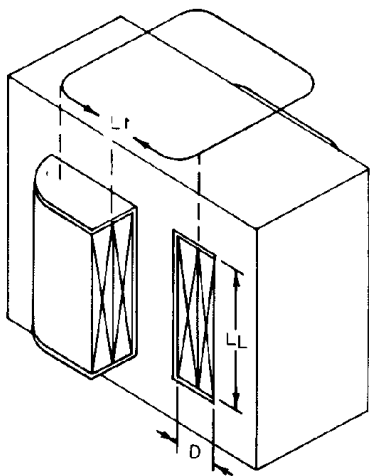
Dimensions of transformer windings, relevant to leakage inductance. How does leakage inductance depend on these dimensions?
